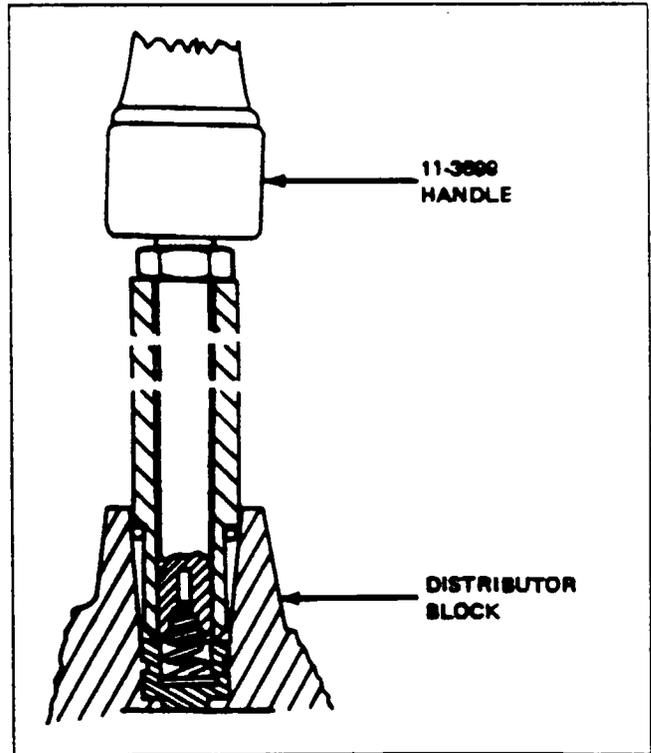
Position of 11-8627 Kit and Contact Spring after Installation
